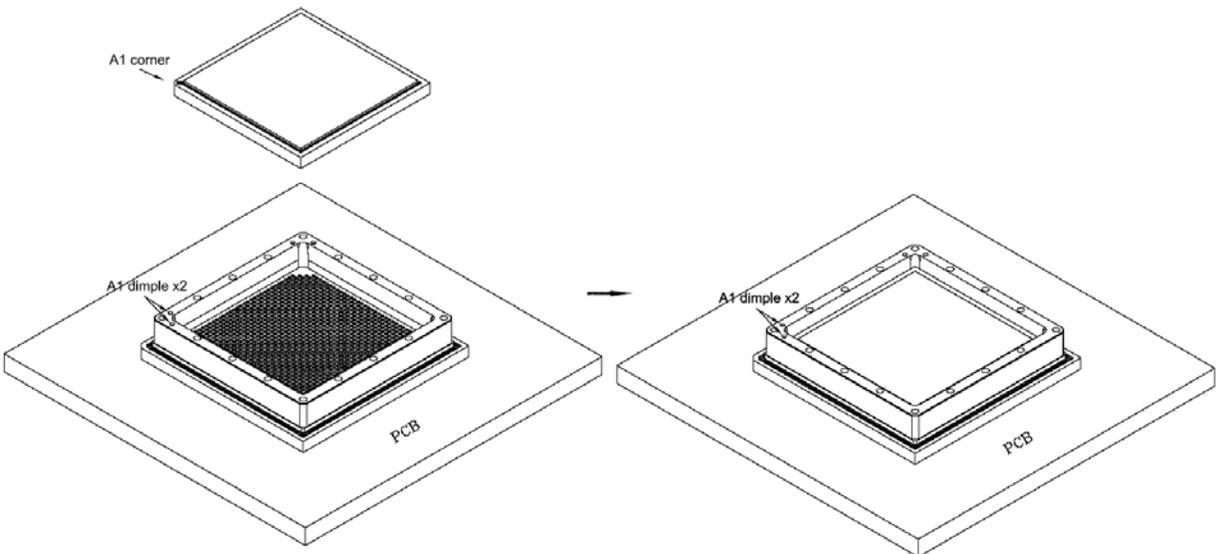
• Placing Socket Interposer into Adapter Assembly
